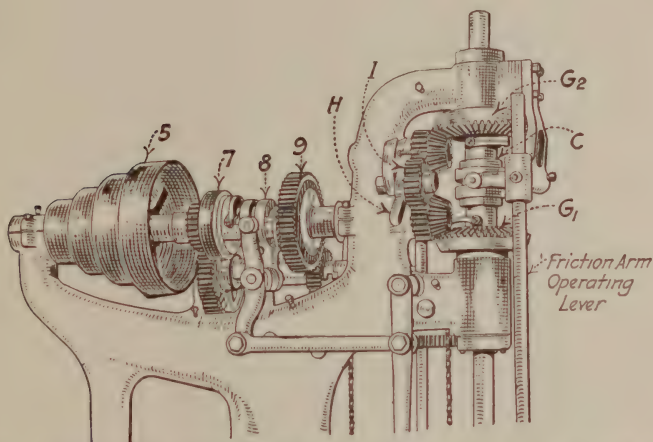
Spindle-driving gears and reversing gears or "tapping attachment," shown with gear guards removed. By means of the friction clutch the direct and indirect (back gear) speed mechanisms and the reverse gears work may be drilled at fast speed, tapped at slow speed, and the tap reversed and withdrawn at fast speed. (See also descriptions of Nos. 5-6-7-8 and 9, Fig. 9.) (Courtesy of The Cincinnati-Bickford Tool Company.)
